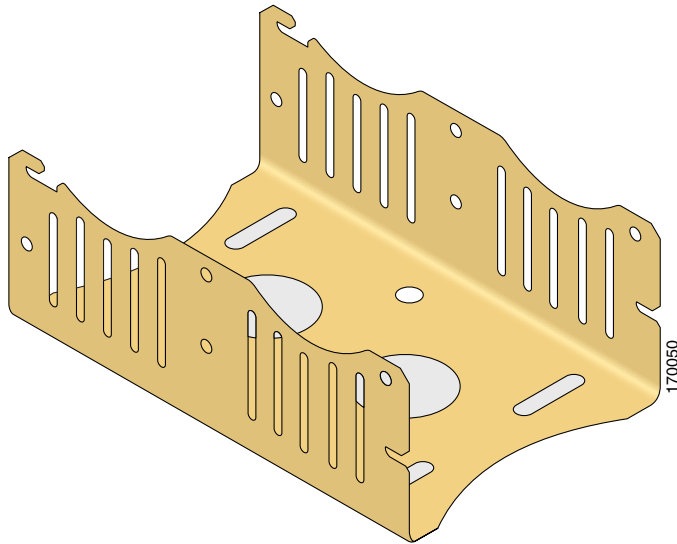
shows the dimensions of the Cisco 3270 Rugged Enclosure mounting bracket.
